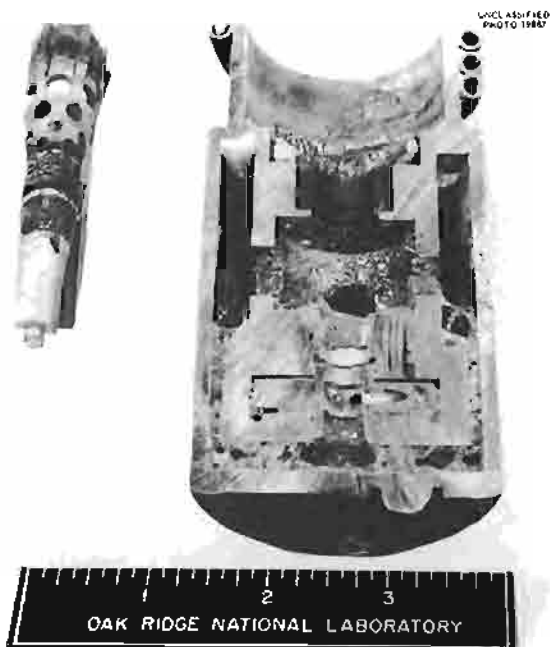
Pump Shown in Fig. 4.1.22 with Shaft Removed to Show Vapor Deposits Above Baffle.
